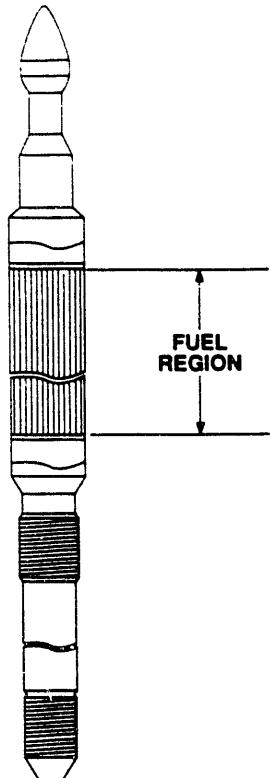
Simplified drawing of a BN600 fuel assembly.
